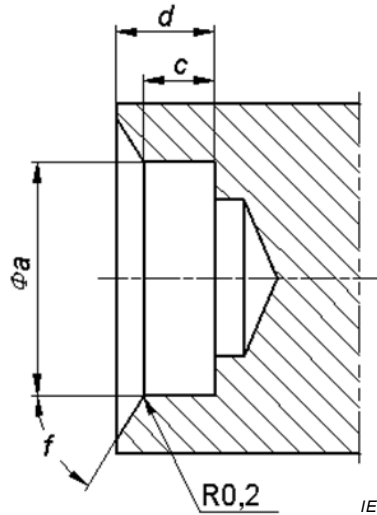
Gauge C for retention test for pin connectors – Smooth bore
